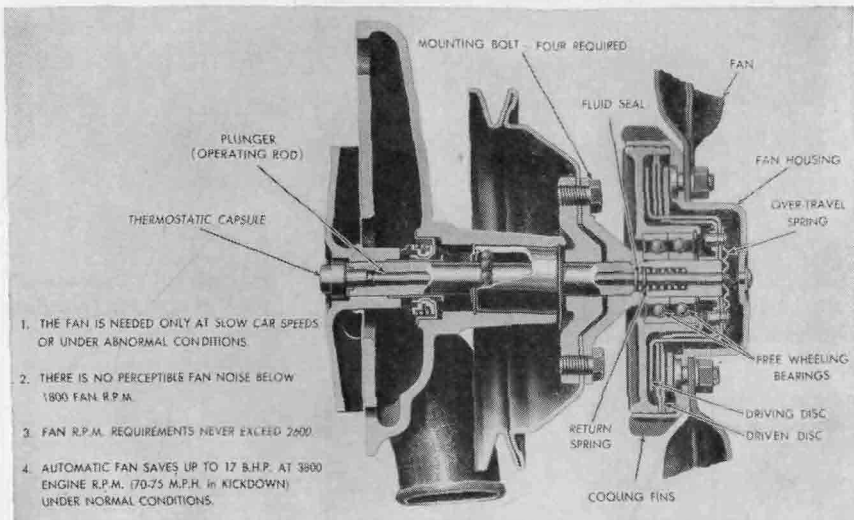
Automatic engine fan with thermostat to control its speed. Fan turns no faster than is necessary to keep engine from overheating. (Mercury Division of Ford Motor Company)
